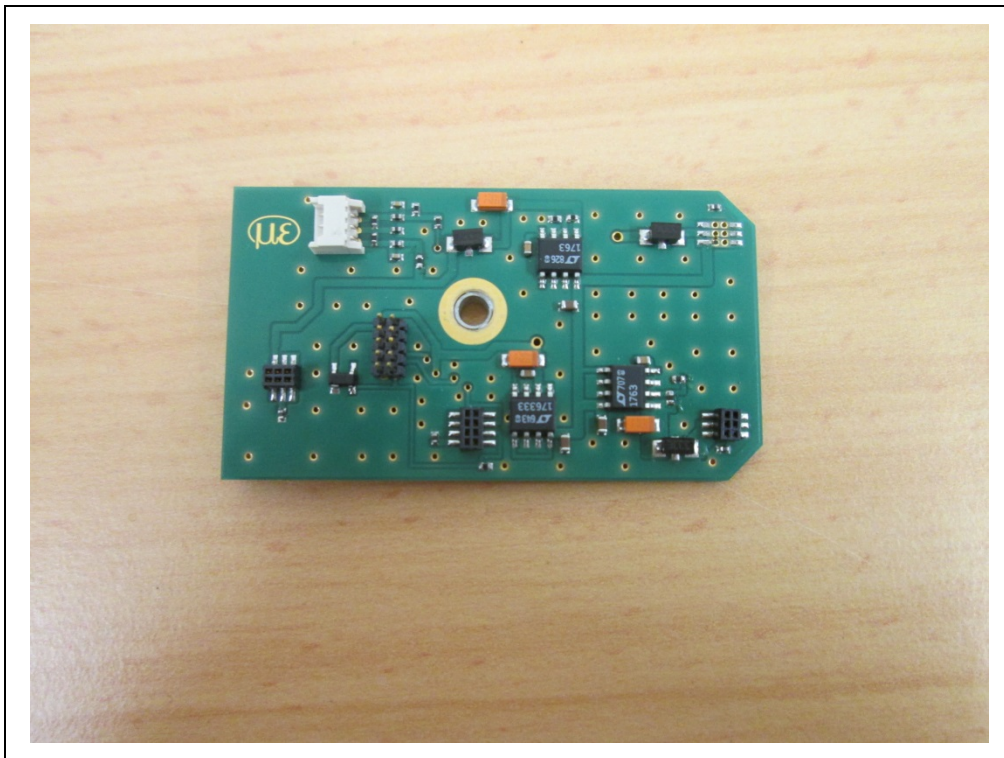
EUT, view of PCB 1 side 1 with connected sensor
